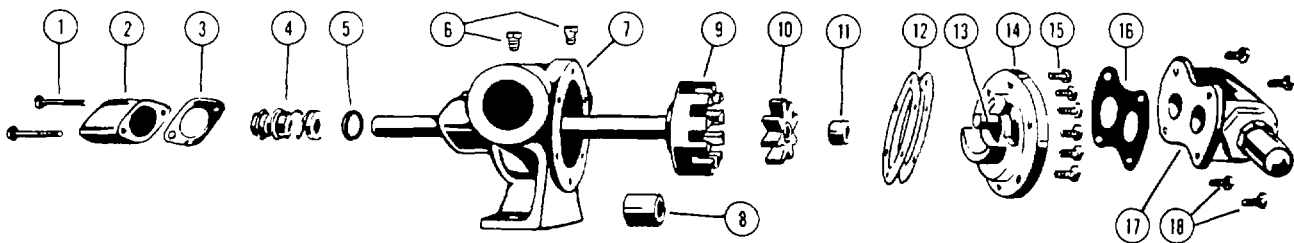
EXPLODED VIEW MODEL G432 PUMP
